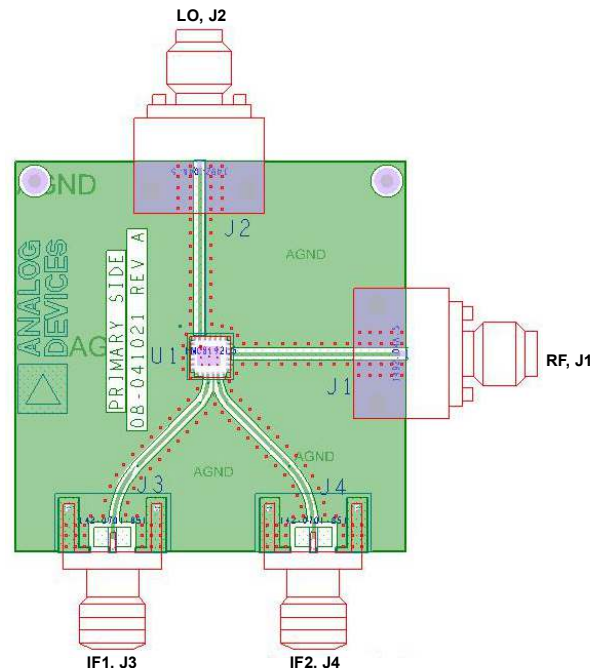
EV1HMC8192LG Evaluation Board PCB, Top Layer
